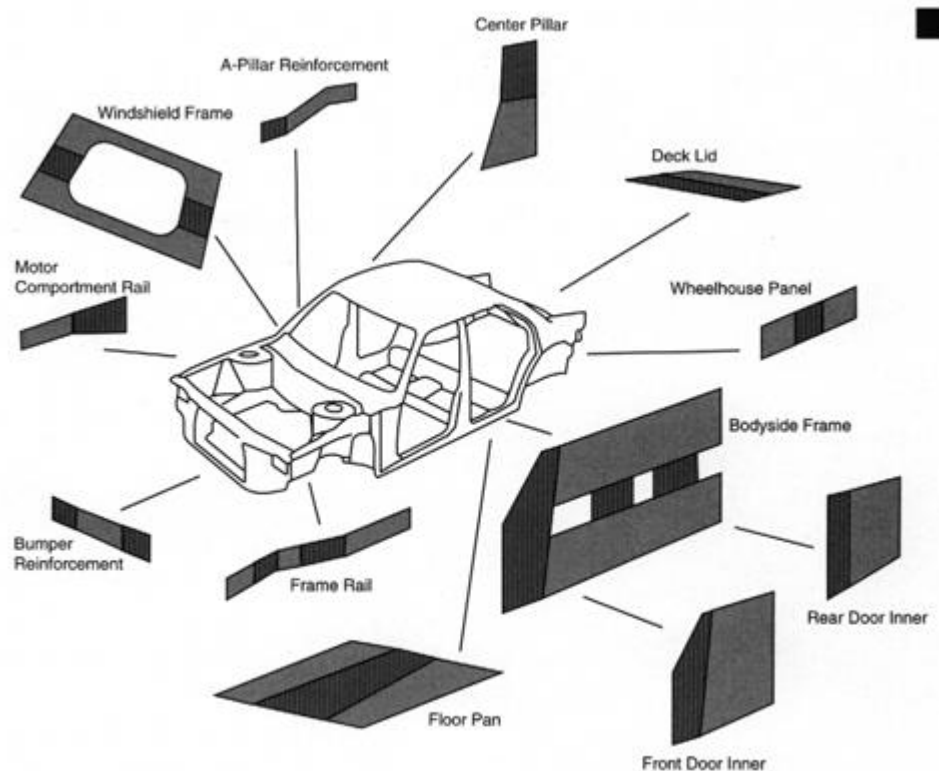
Body panels made using tailor welded blanks (Kinsey, Viswanathan, & Cao, 2001).
